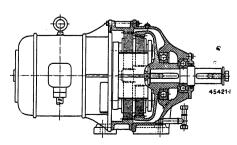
Motor gear with PC gear for speed ratios of about 1 to 35 up to 1 to 1000 and more.
